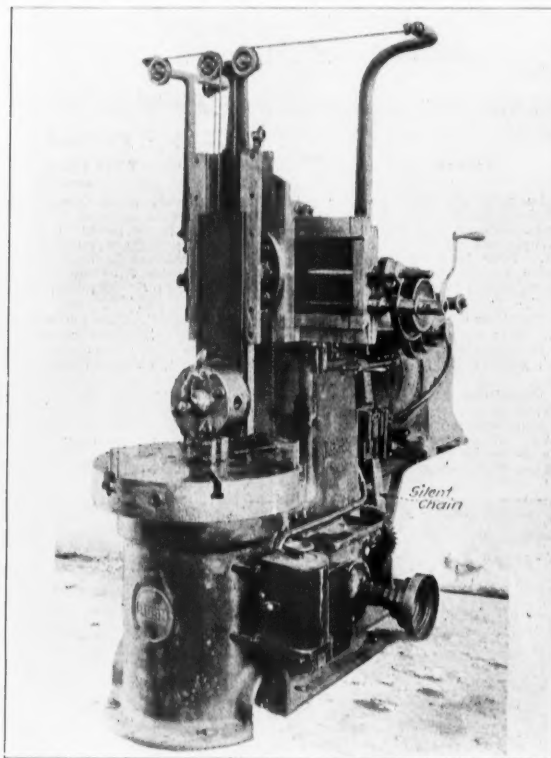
Boring Mill Chain Driven From Constant Speed Motor.
